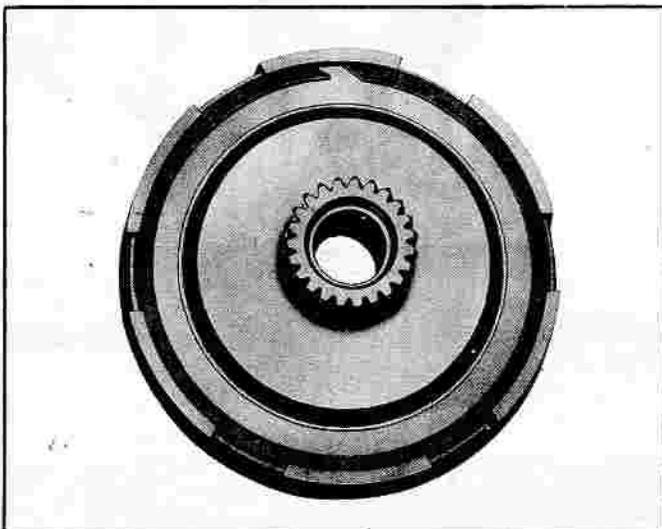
E-38—Clutch Flange and Low Sun Gear Retainer Ring Installation
